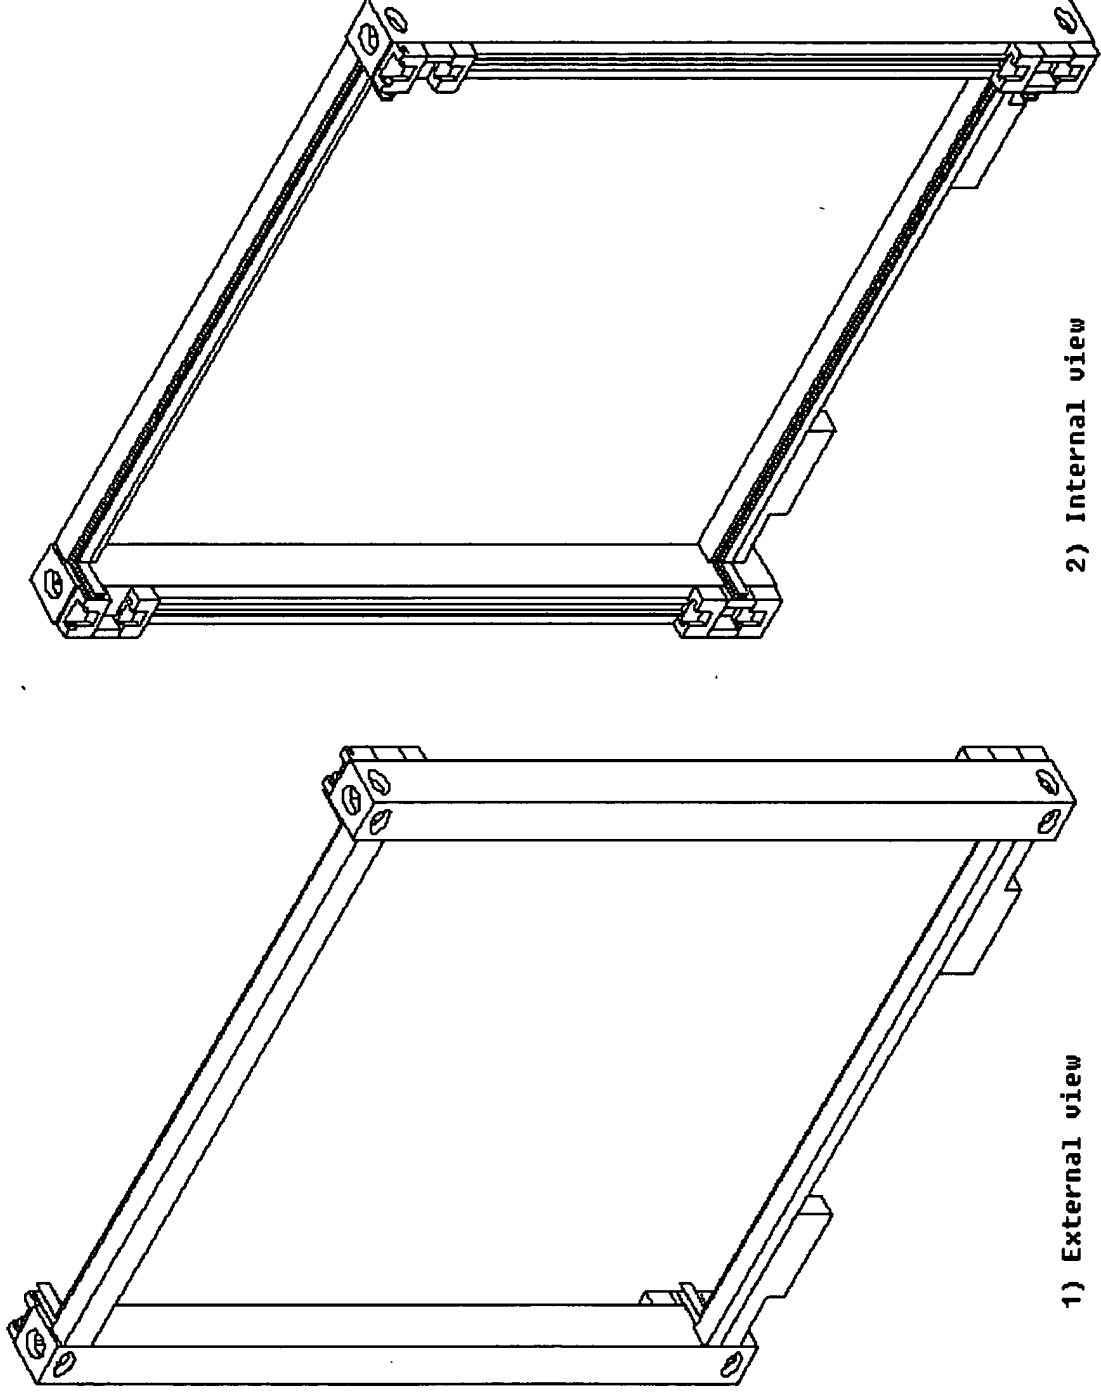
A: Isometric views of a left frame (40 foot collapsible cargo container)
